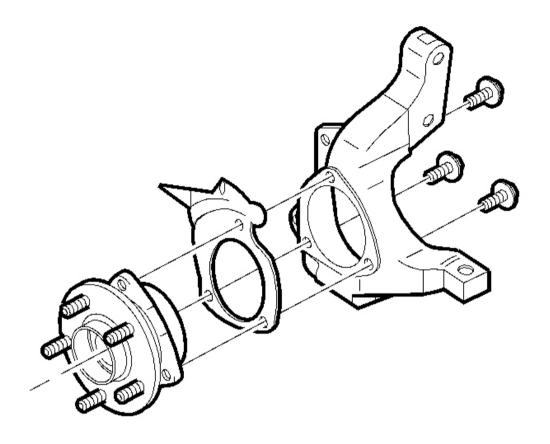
Wheel Bearing/Hub & Mounting Bolts Courtesy of GENERAL MOTORS CORP.
